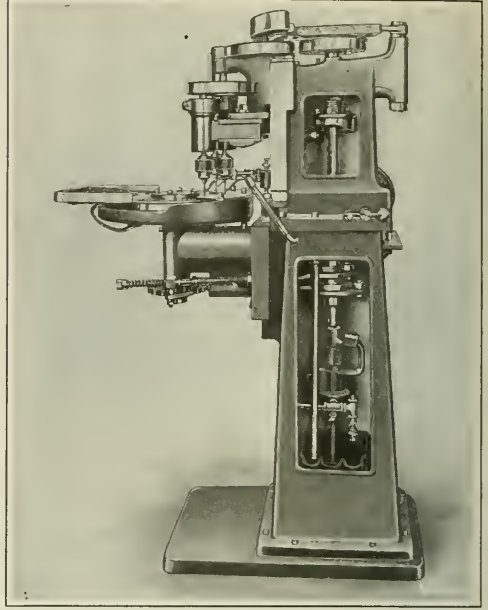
Left-hand Side of Machine with Various Covers removed to show the Operating Mechanism
